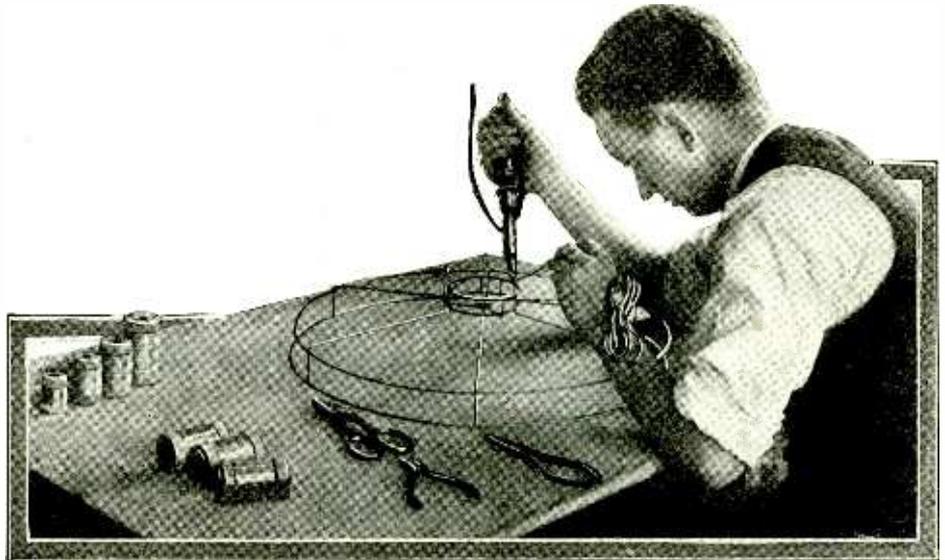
In the photograph above an electric soldering iron is being employed to solder the wires forming a lamp shade frame together. Wirecraft is a fascinating art.
